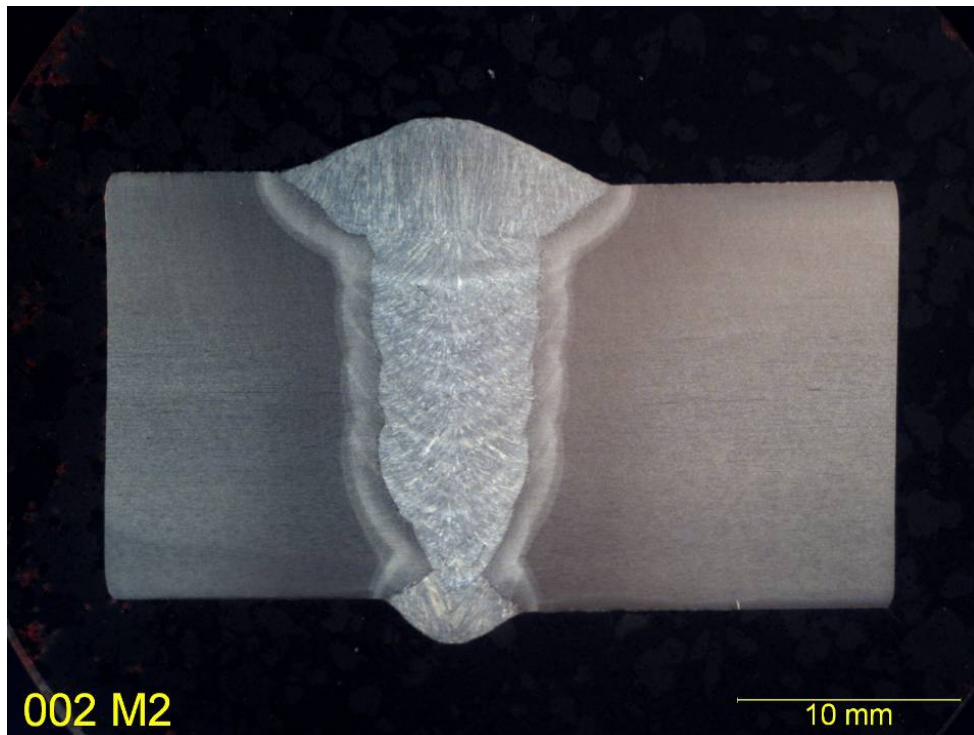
Photo-macrograph Showing Cross-section of Weld A2
